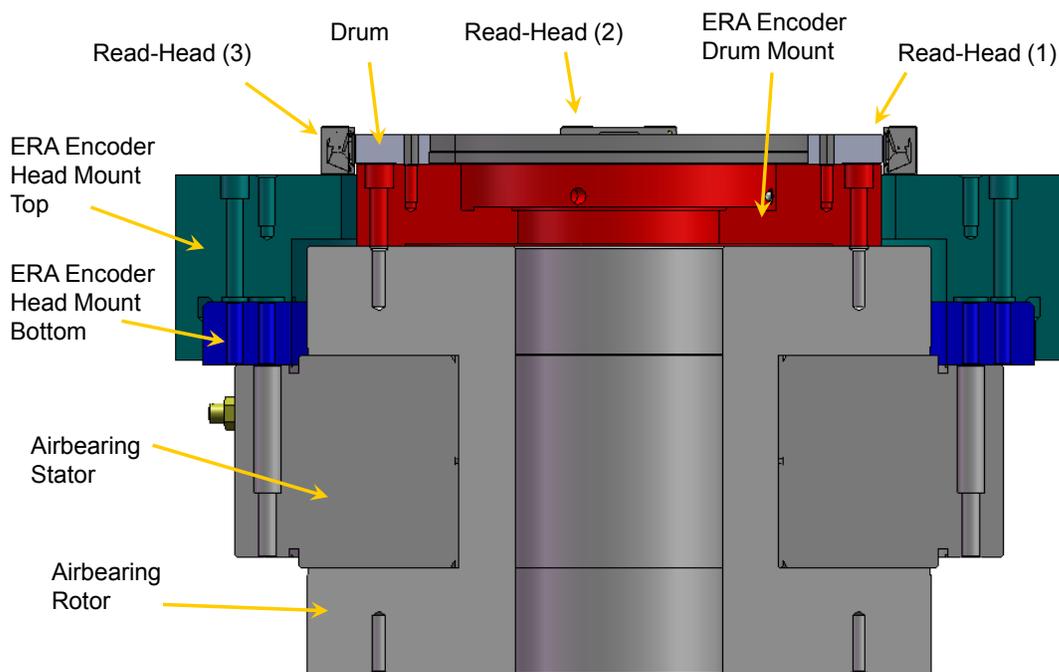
Section-view of the ERA4282C encoder's mounting onto the airbearing
